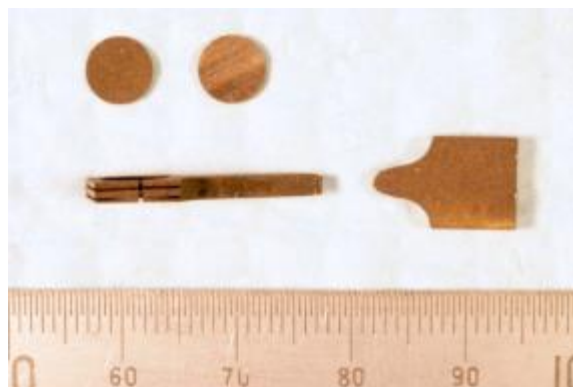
EDM machining of tested mini-tensile sample. Two small punch discs can be obtained from each end-tab (the third is too thin for testing).
